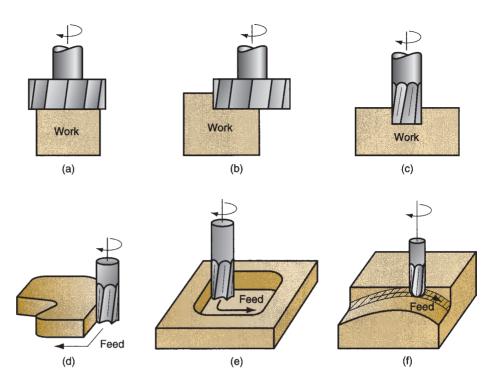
Face milling: (a) conventional face milling, (b) partial face milling, (c) end milling, (d) profile milling, (e) pocket milling, and (f) surface contouring.
